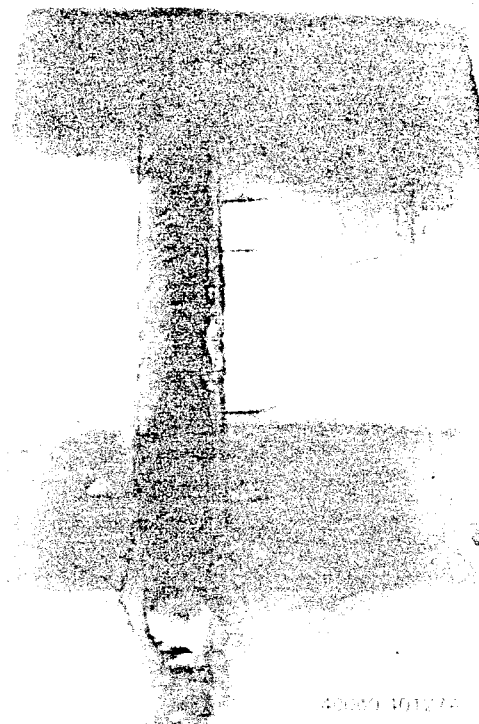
Unpeened Type 347 stainless steel pipe weld (Stress corrosion cracks that developed during 23 h in $MgCl_2$ SCC test. No cracks developed in a similar peened weldment after 120 h).
